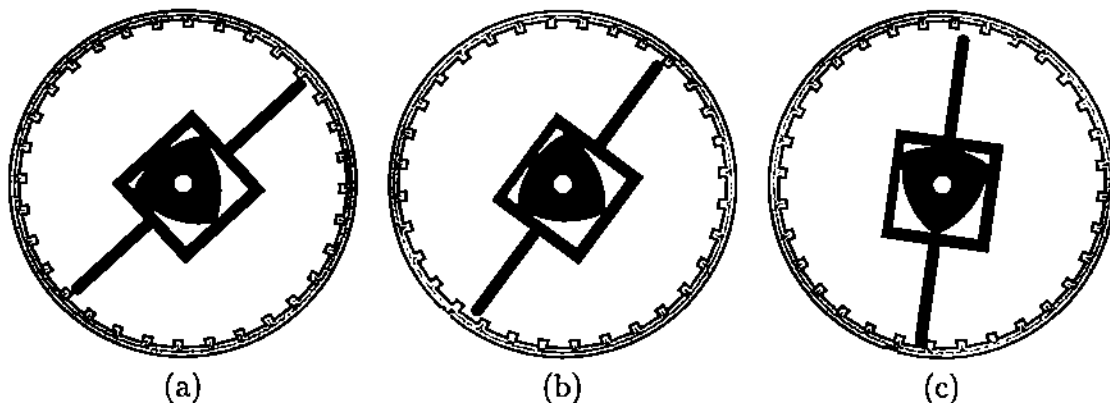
Intermittent gear mechanism: (a) upper follower pawl engaged, (b) follower disengaged, (c) lower pawl engaged.
